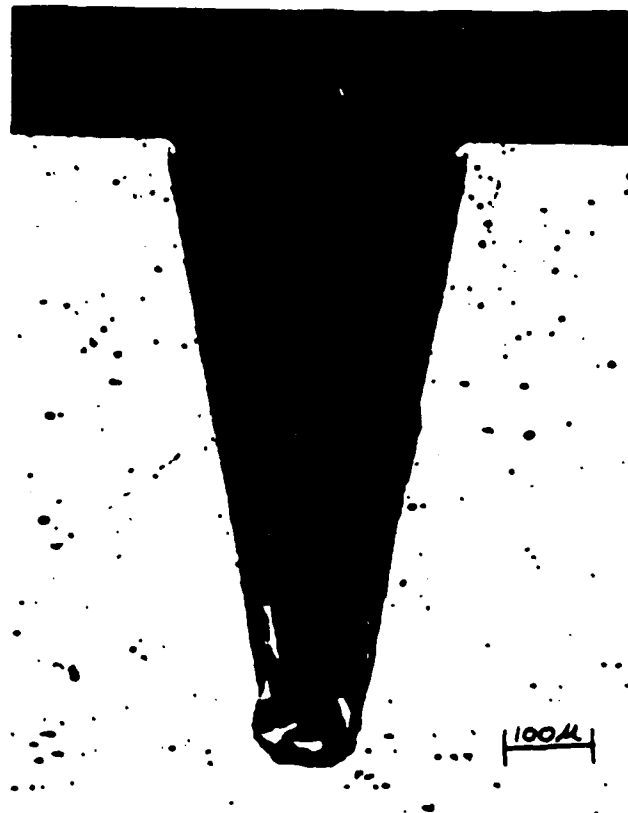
Deepest machined notch (.025 in.). Mean root radius is .0015 - .002 in. 128X.
